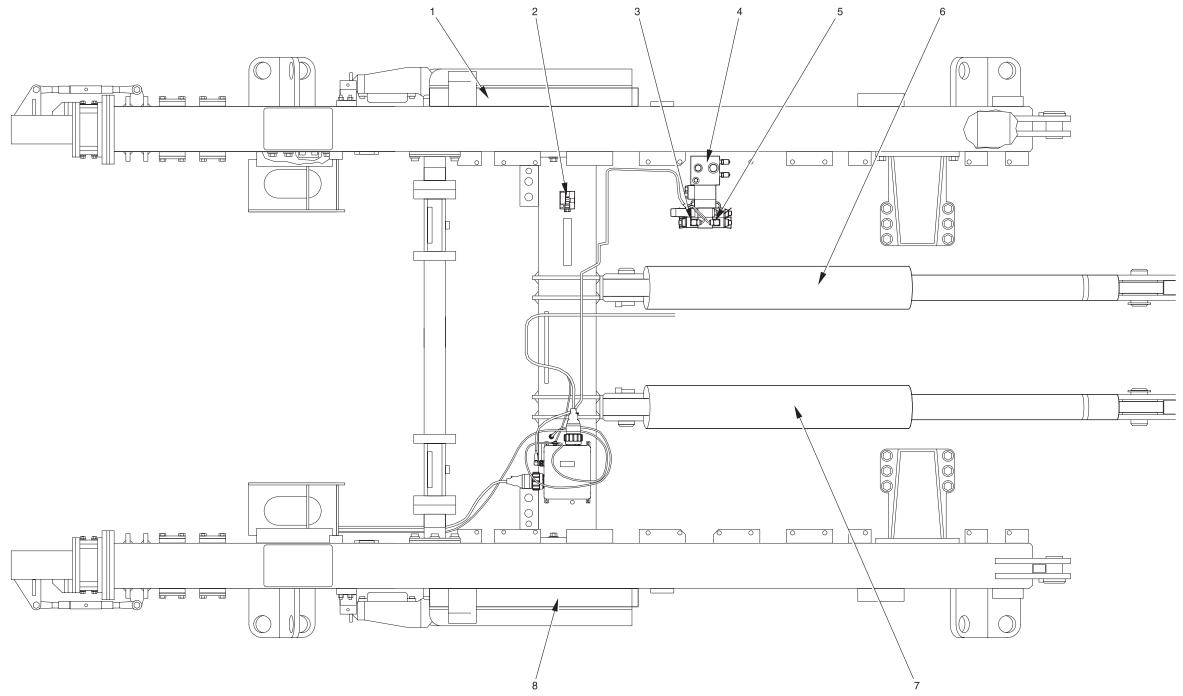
SLIDE FRAME HYDRAULIC ASSEMBLY LOCATIONS
